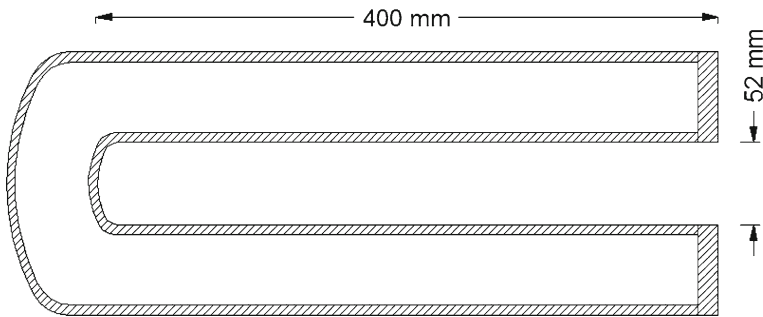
Drawing of the cesium-filled heat-pipe blackbody source (thermowell not shown)
